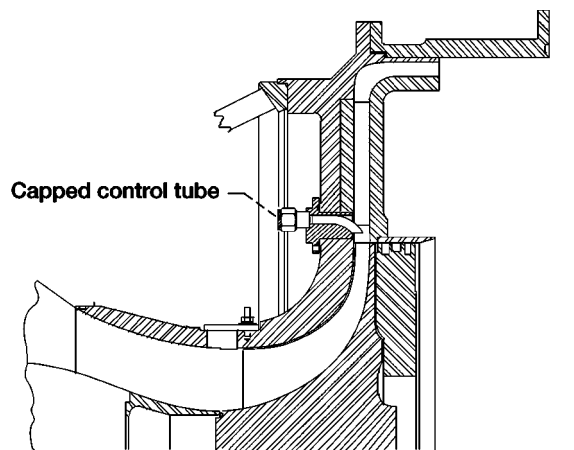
Cross section of test compressor showing control tube configuration tested in [2]
